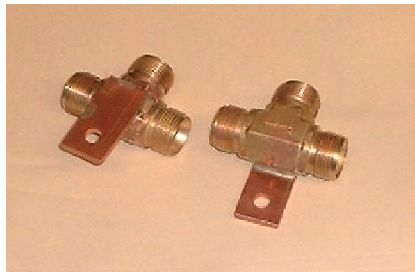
QUIC trap electrical connectors photo. These connectors are used to connect the wire that is inside the water tube to the outside world. They consist of a standard brass Swagelok connector which has a hole drilled for soft soldering. The pieces are initially silver soldered with a copper tab to be used as a lug terminal. The internal connection is covered with epoxy to protect from etching by the water.
